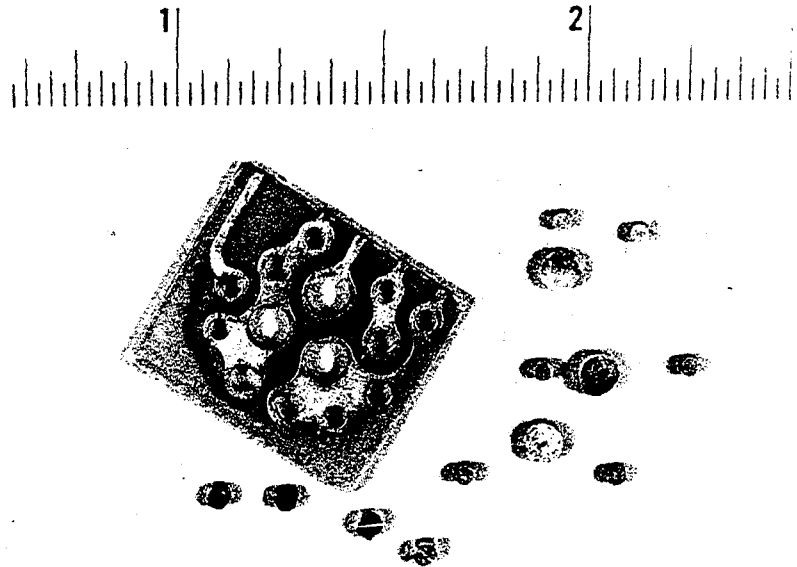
Swiss Cheese circuit board and components ready for assembly.
